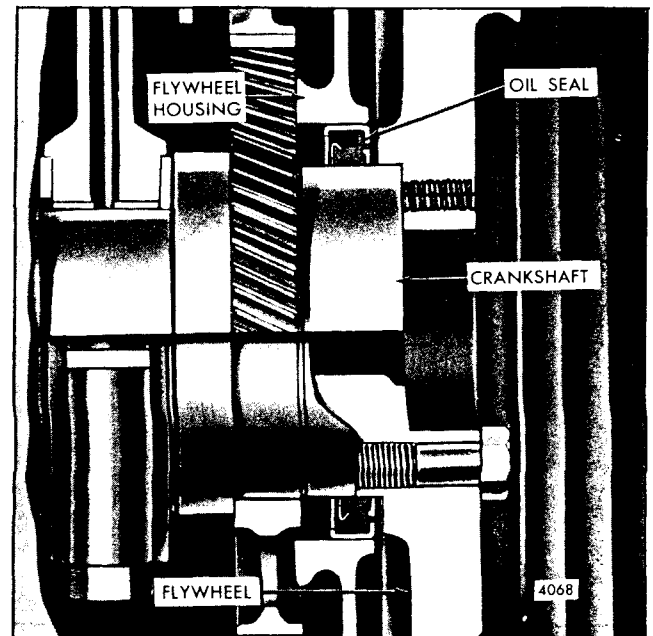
Crankshaft Rear Oil Seal (In-Line and 6V Engines)
